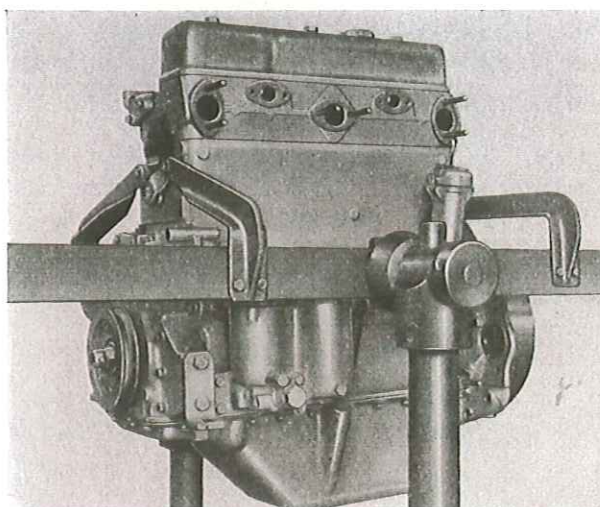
Left-side view of engine on rotary stand ARR 2216 (Note the front brackets position).
